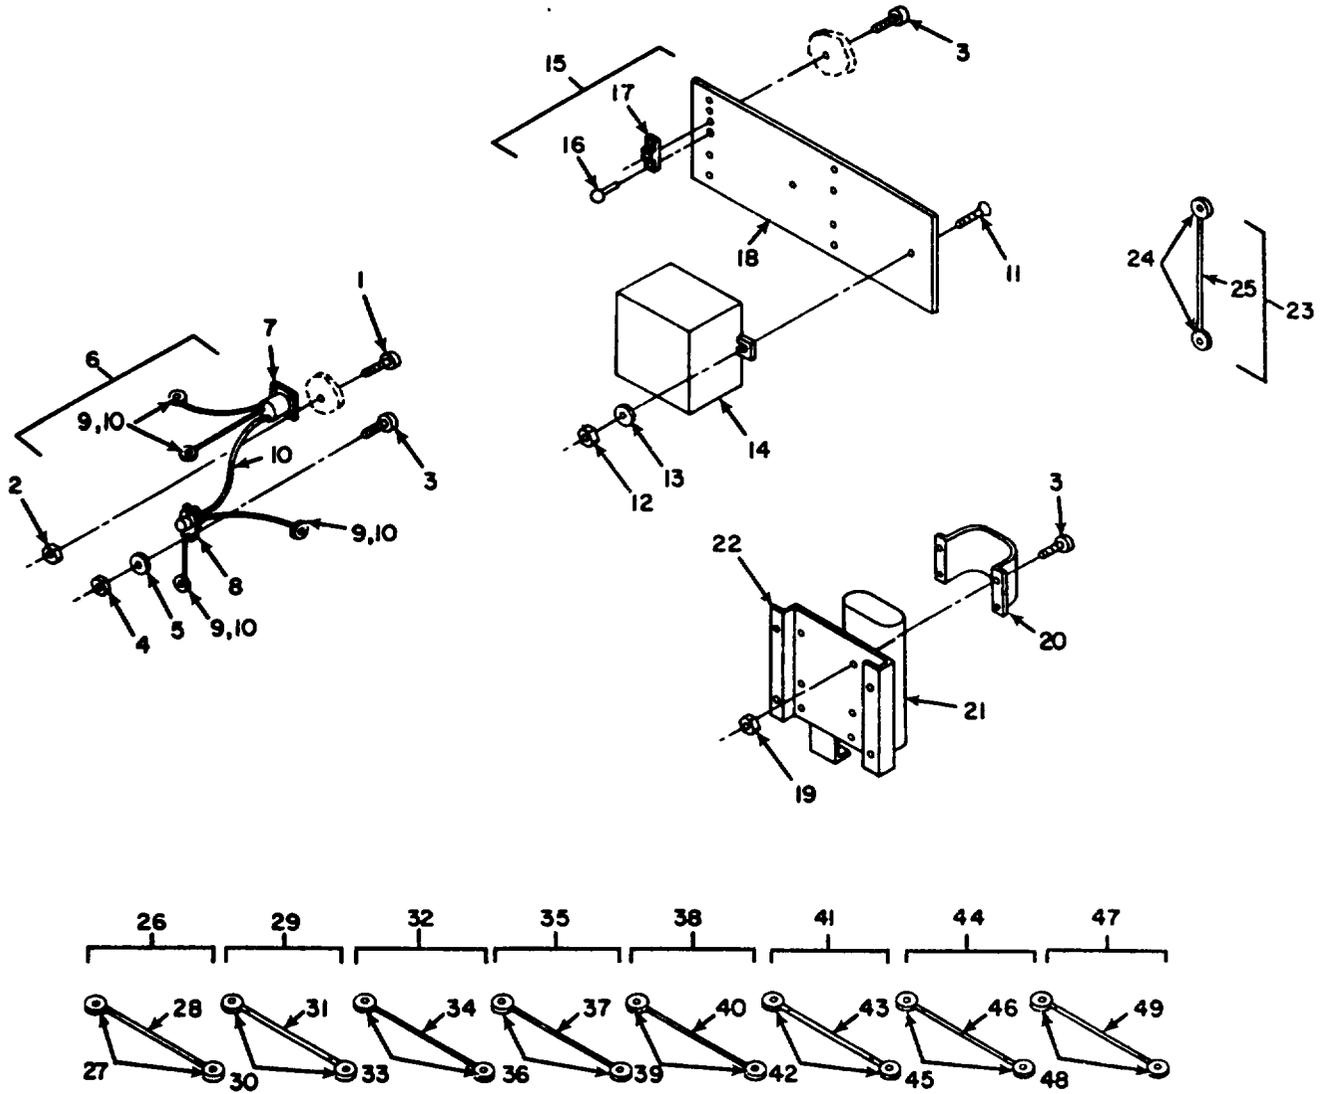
Wiring Harness and Electronic Components (Sheet 1 of 2)
